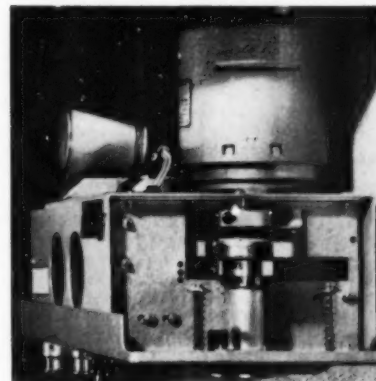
Take-up assembly of Magnecorder, showing the clutch with the knurled split adjustment nut at the end of the shaft.
